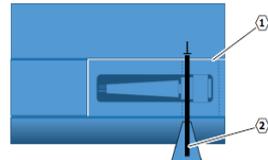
Install a pillar(s) to support "free edge" of upper deck and avoid load on fin stabilizer
